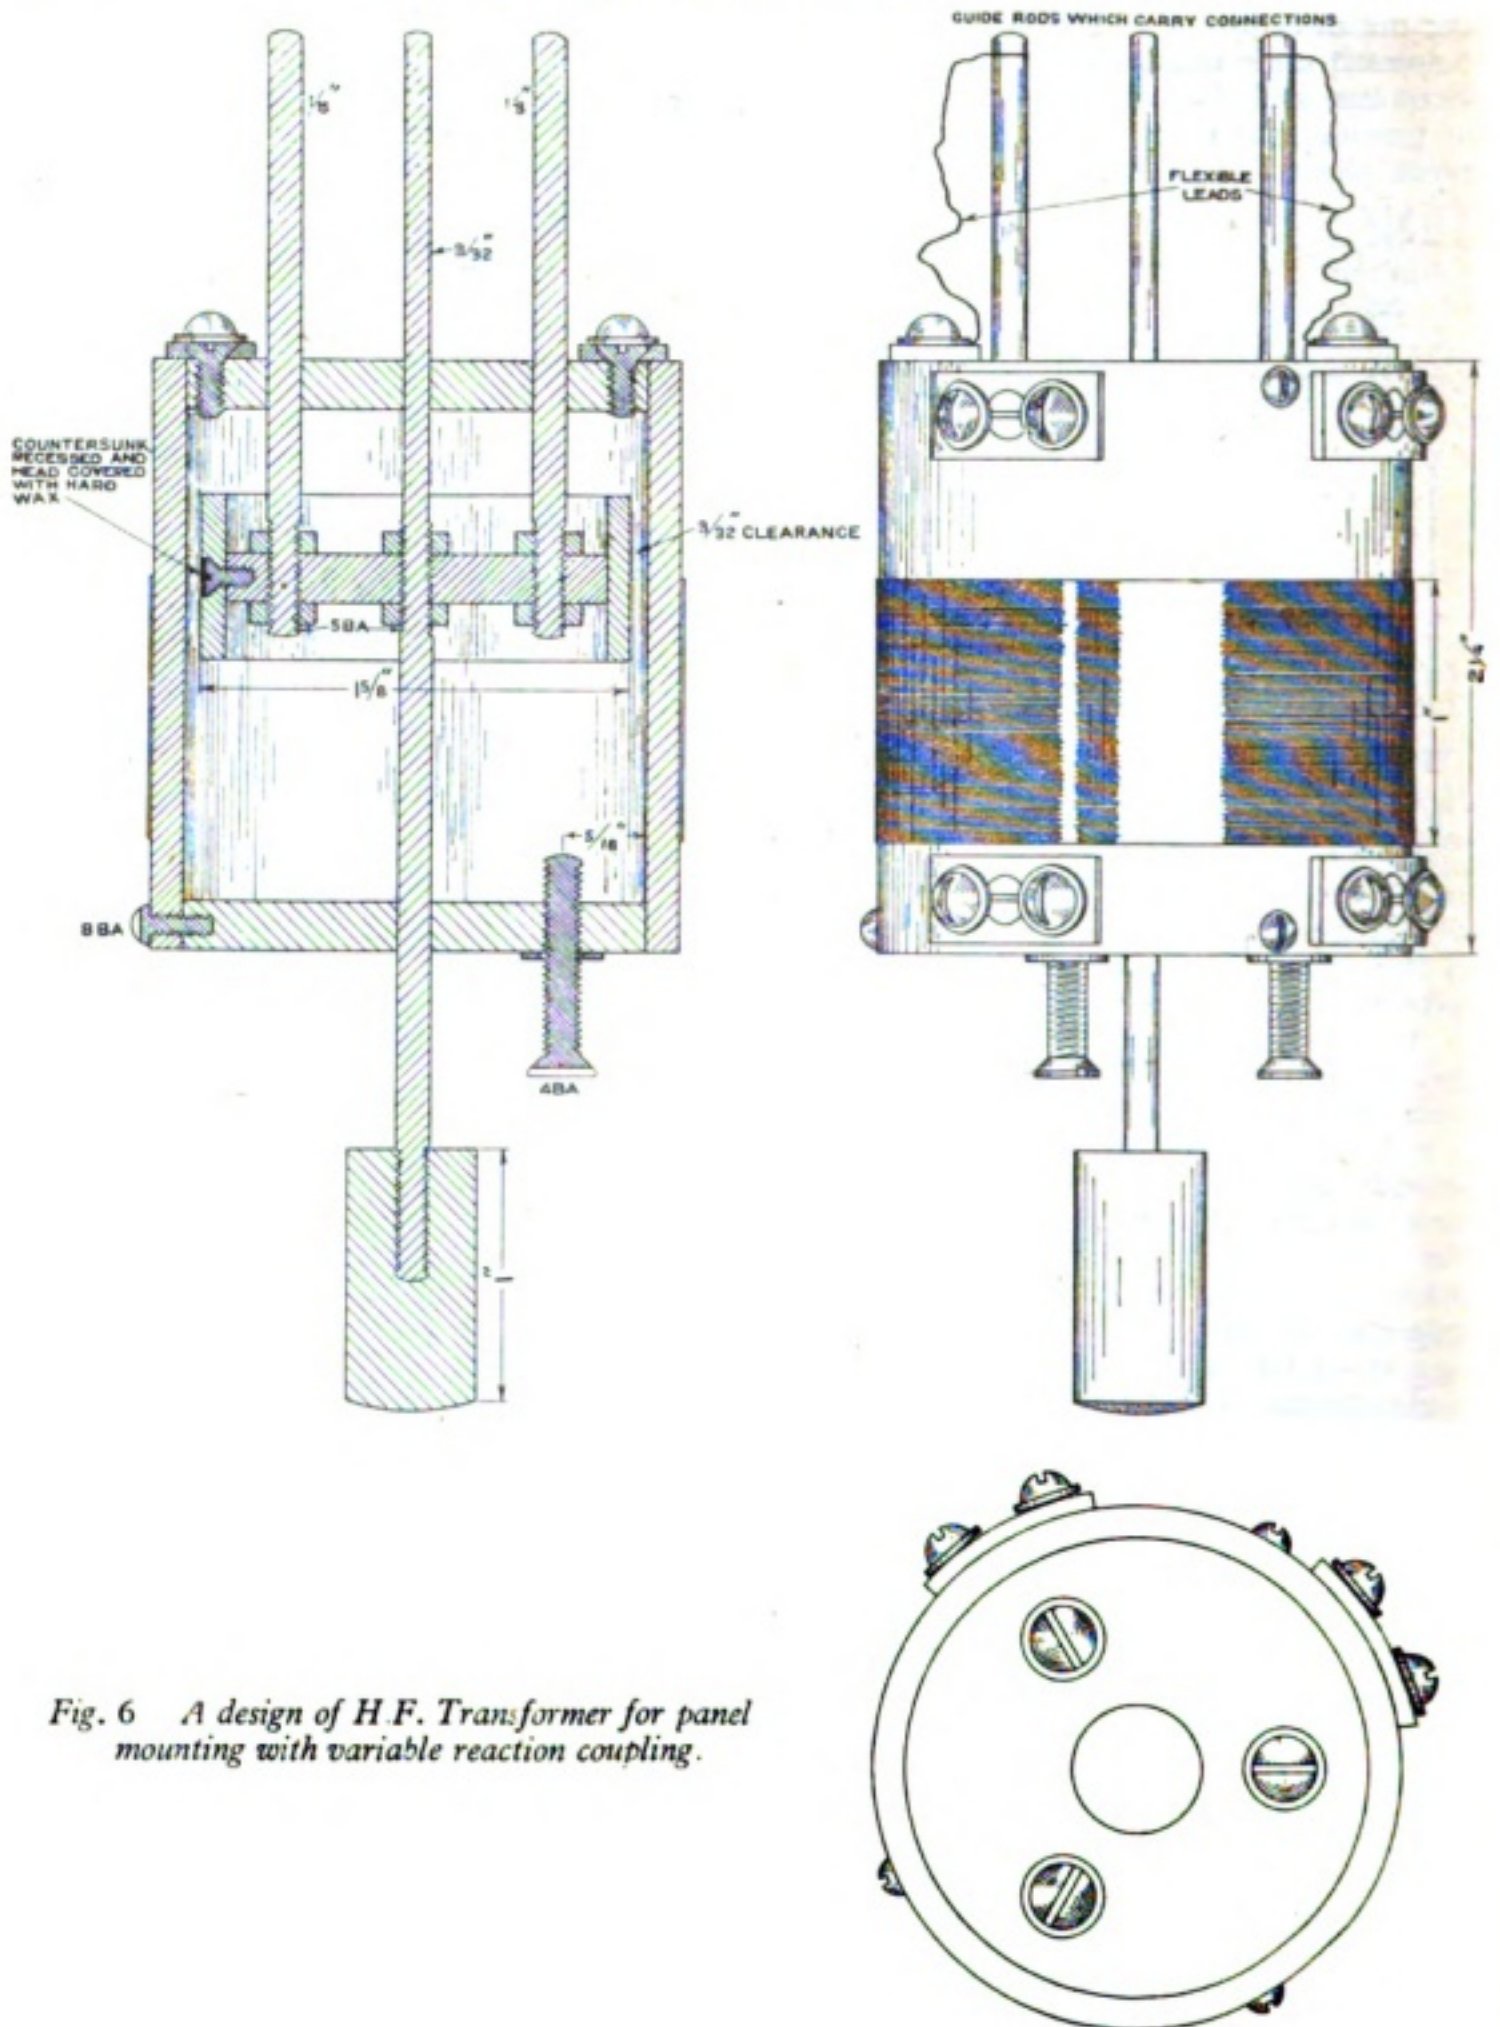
A design of H.F. Transformer for panel mounting with variable reaction coupling.
